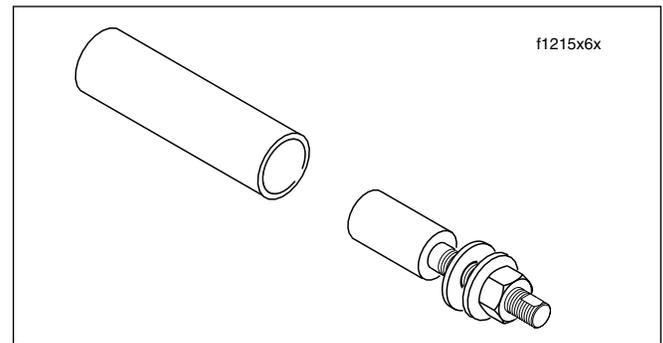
Mainshaft Bearing Inner Race Installer (Part No. HD-34902B)
